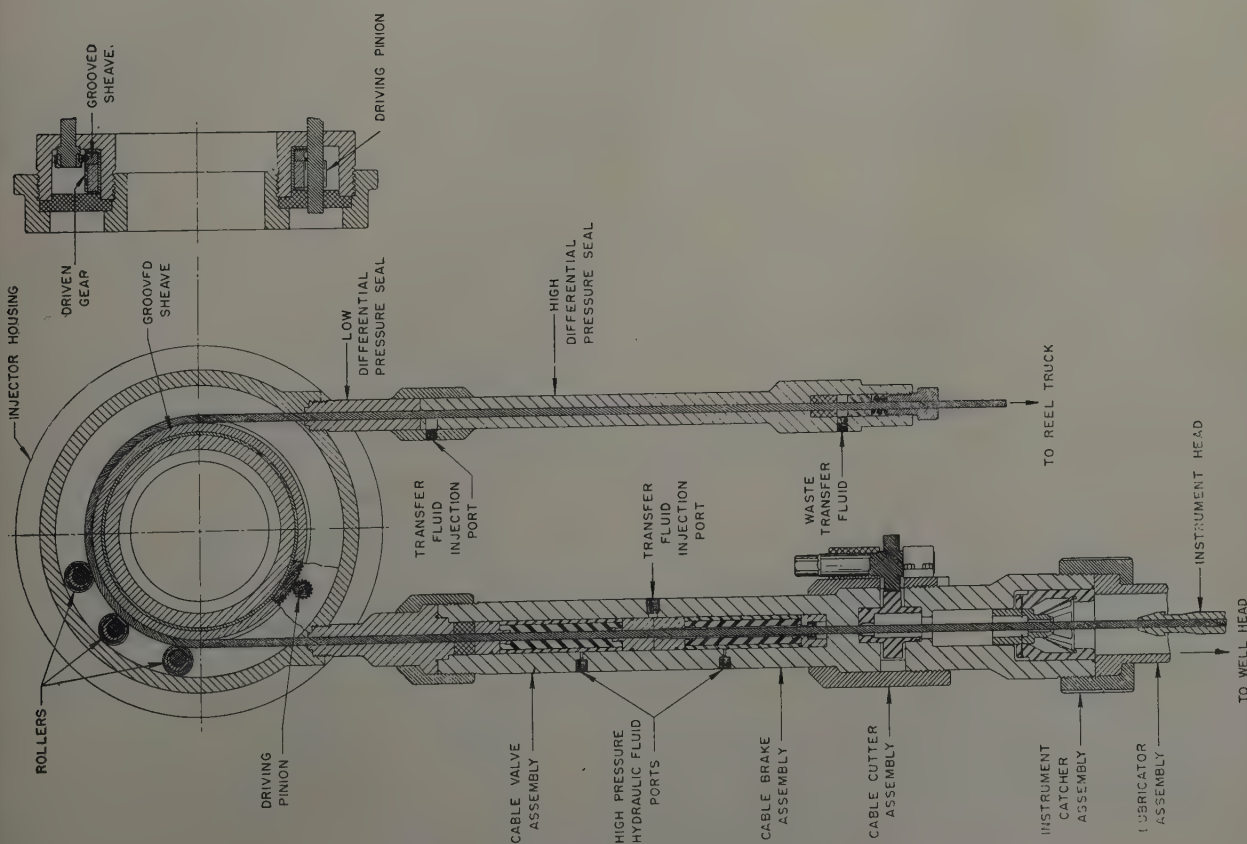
HIGH PRESSURE LUBRICATOR.
